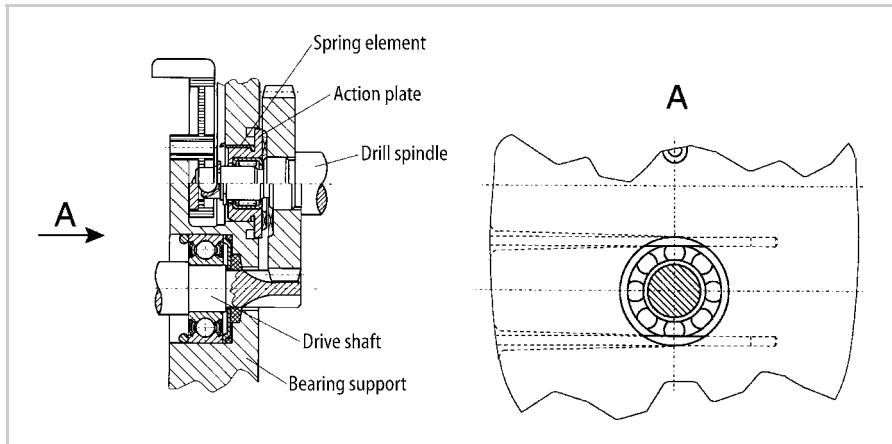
Disassembly-friendly gearbox of a hammer drill (Bosch) [7.118]
